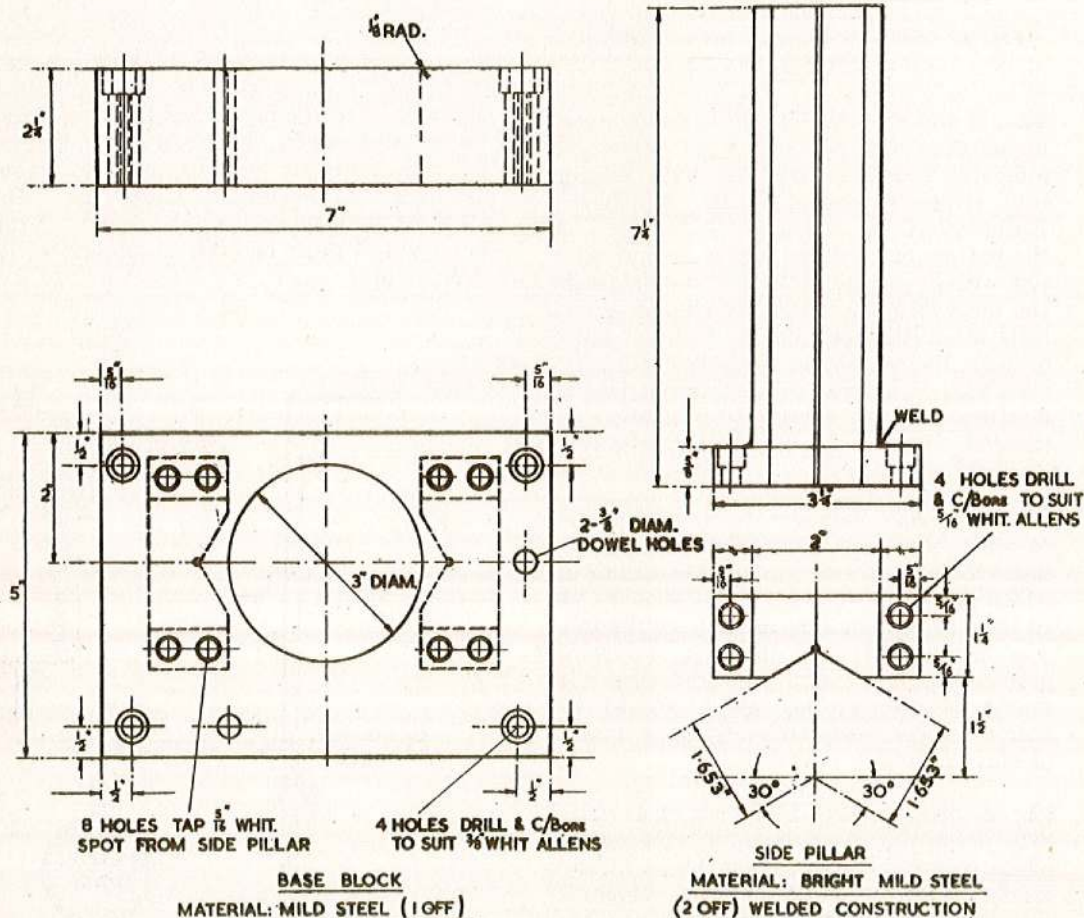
BASE BLOCK AND SIDE PILLARS FOR STRIPPING AND ASSEMBLING FIXTURE
